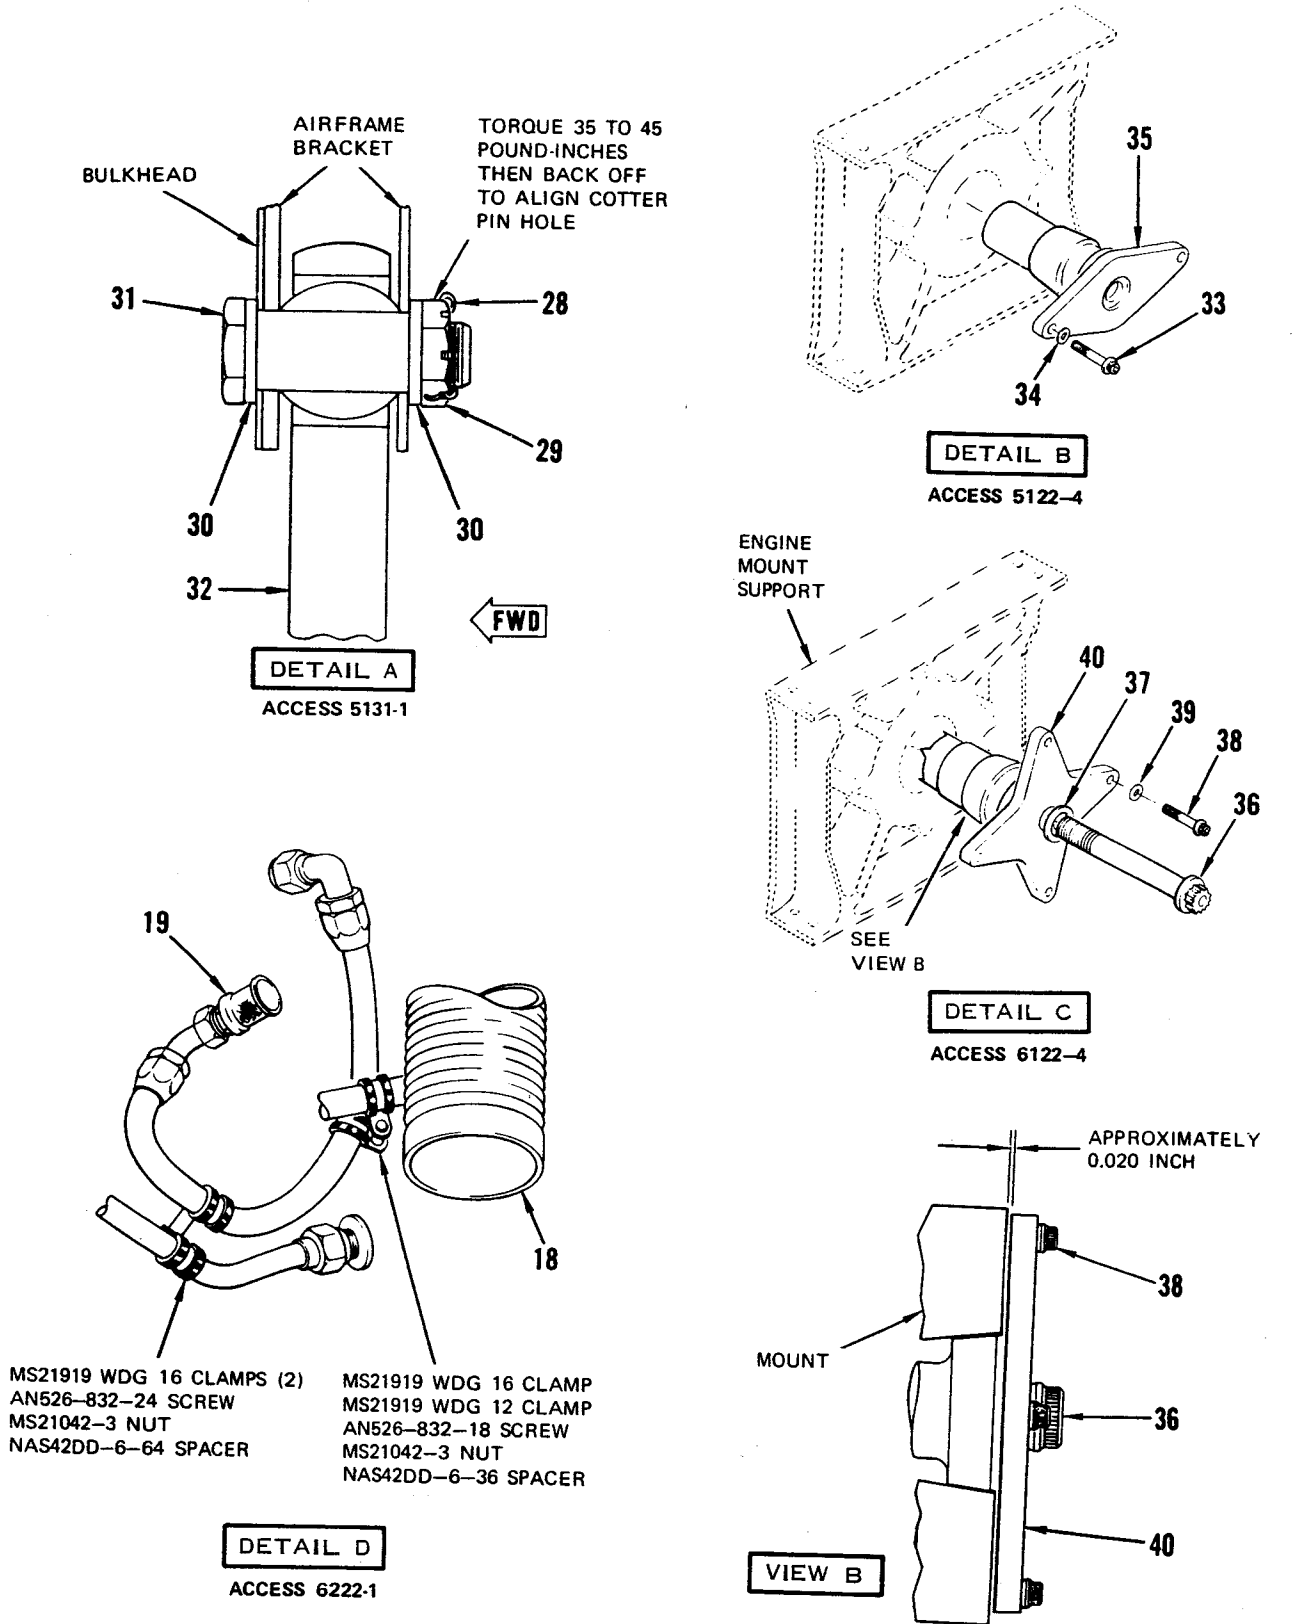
Removal and Installation; Engine (Sheet 2)
